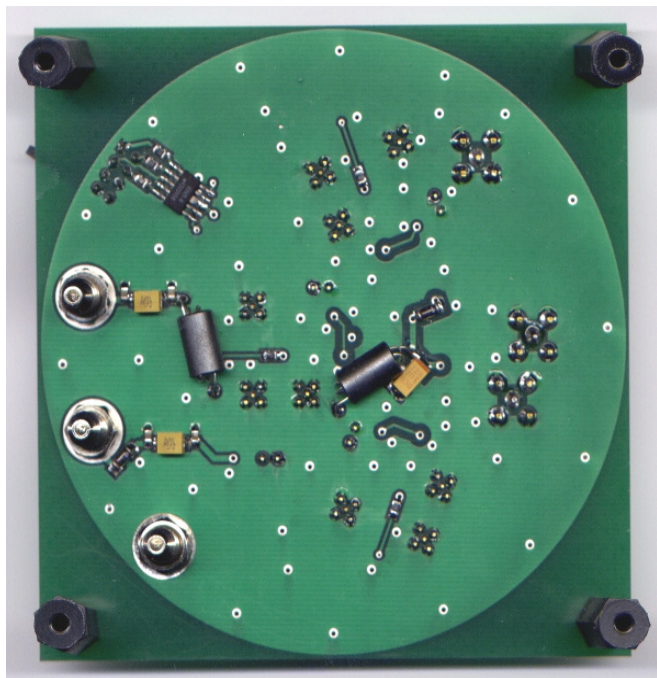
Example test board LIN (transceiver with Wake-up pin), Bottom layer
